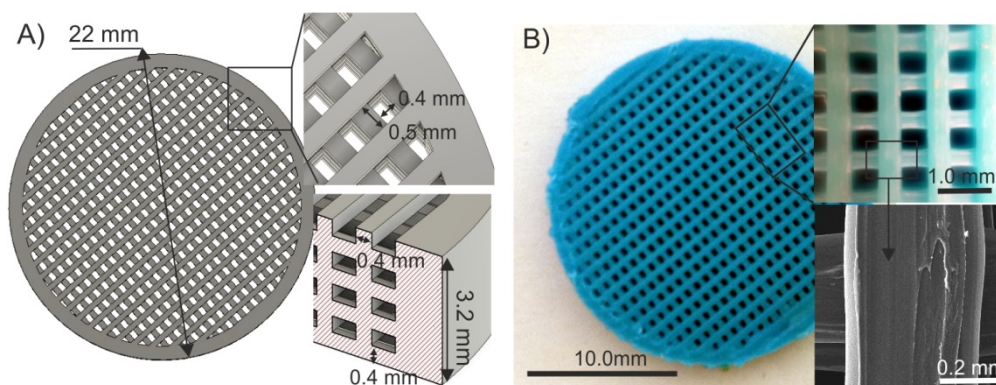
3D printed ABS filter. A) CAD design, B) printed filter images.
